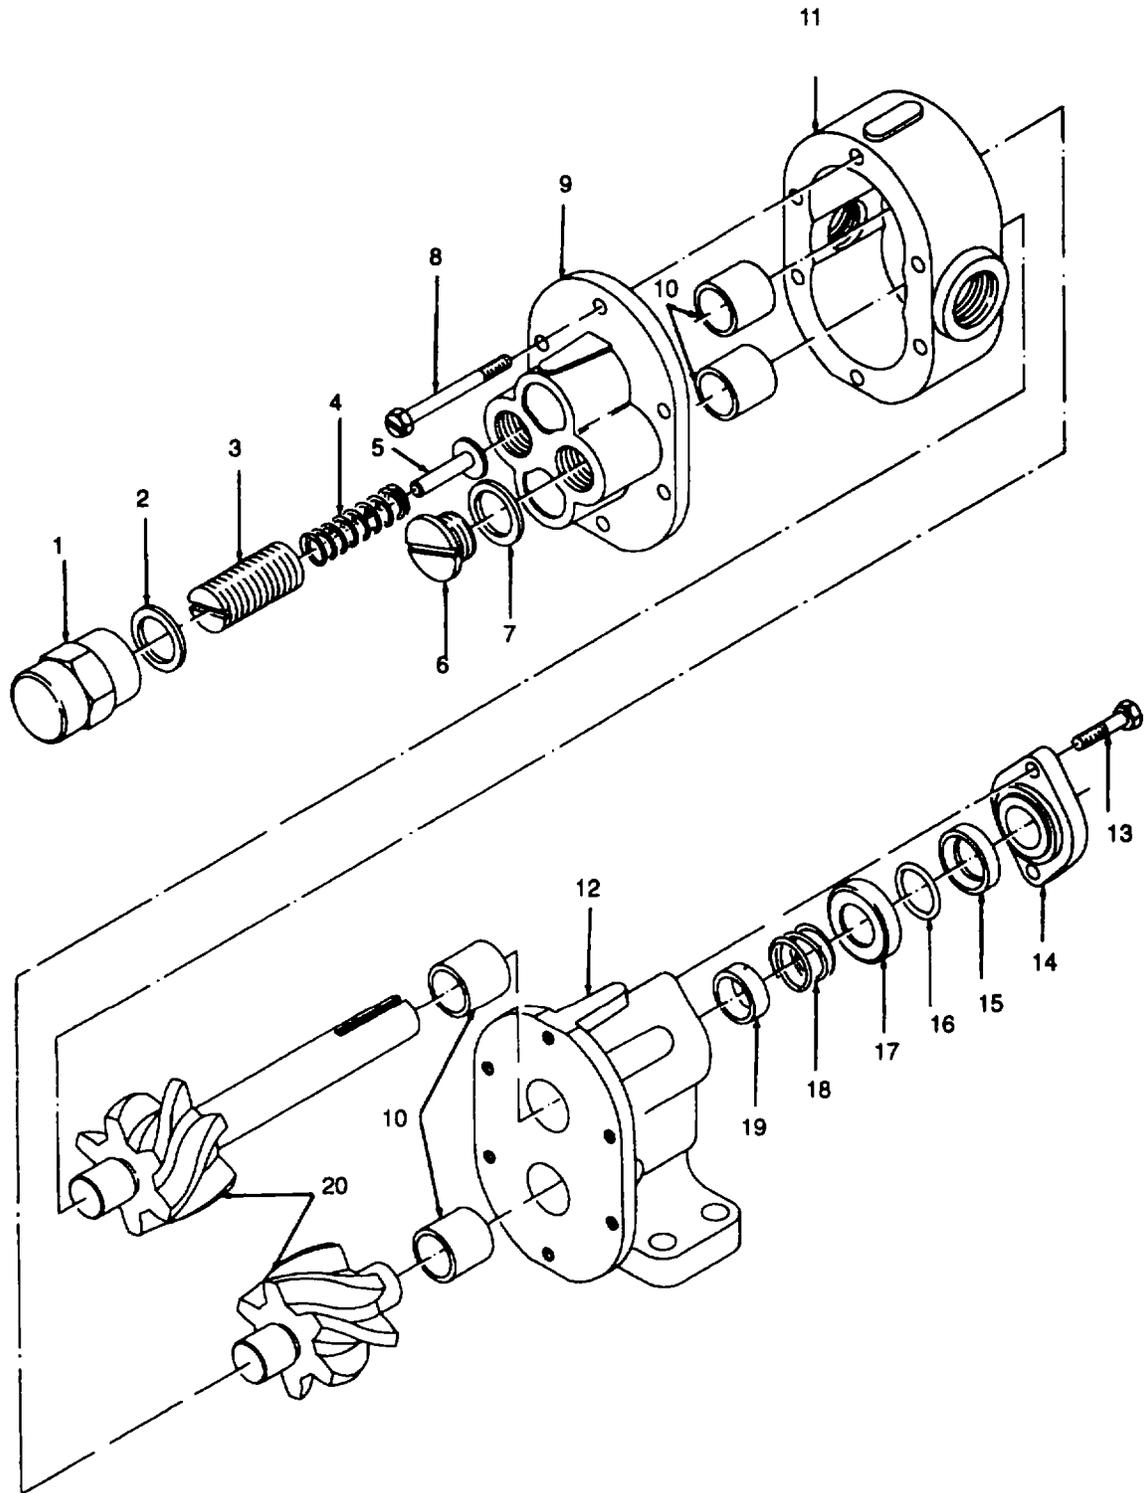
Fuel Transfer Pump, Exploded View (Sheet 1 of 2)
